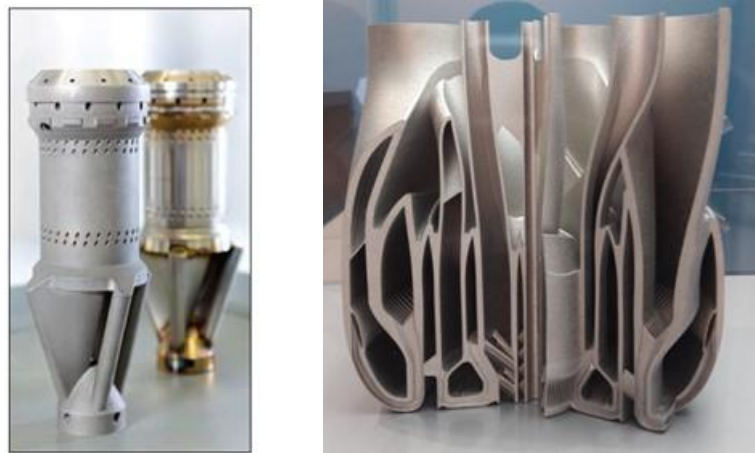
AM burner front vs conventional burner front and Burner Design Study. The new SLM manufactured burner front consists of one component and two welds. (Source: Siemens; «Gas Turbine World»)
